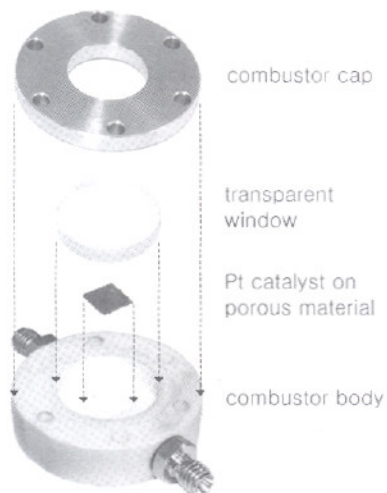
Parts view of the sub-millimeter scale catalytic combustor
